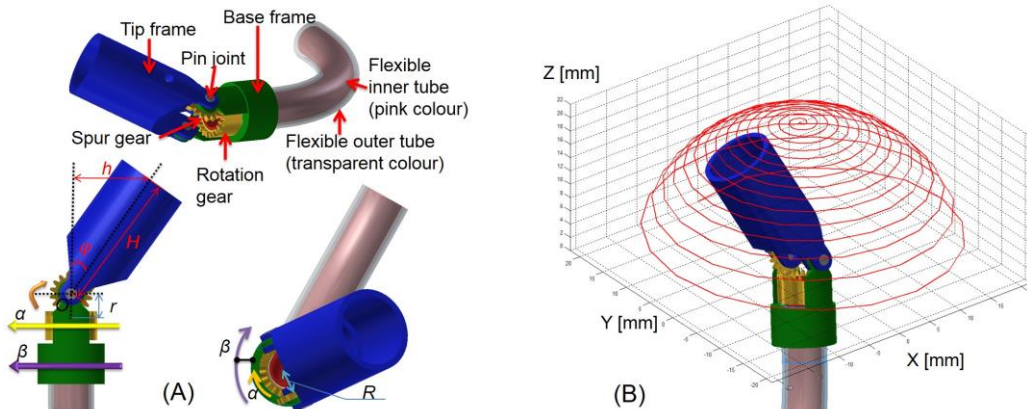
Scanning mechanism, (A) transforming rotational motion of the Flexible outer and inner tubes to a scan motion of the distal end. (B) Spiral trajectory of the distal end.
